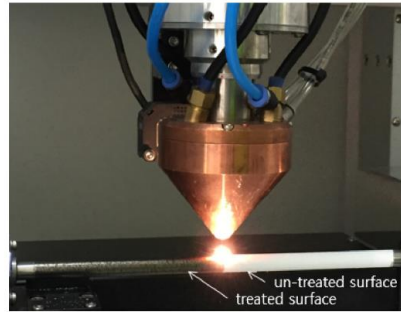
Appearance of ODS treatment using laser technology on commercial Zircaloy-4 cladding tube surface.
